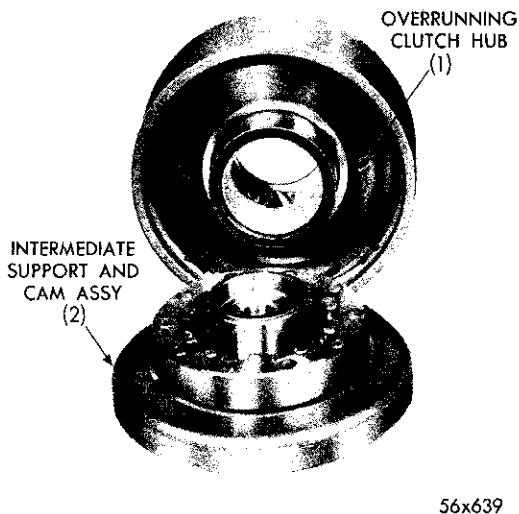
Removal and Installation of Intermediate Support and Cam Assembly from Overrunning Clutch Hub
